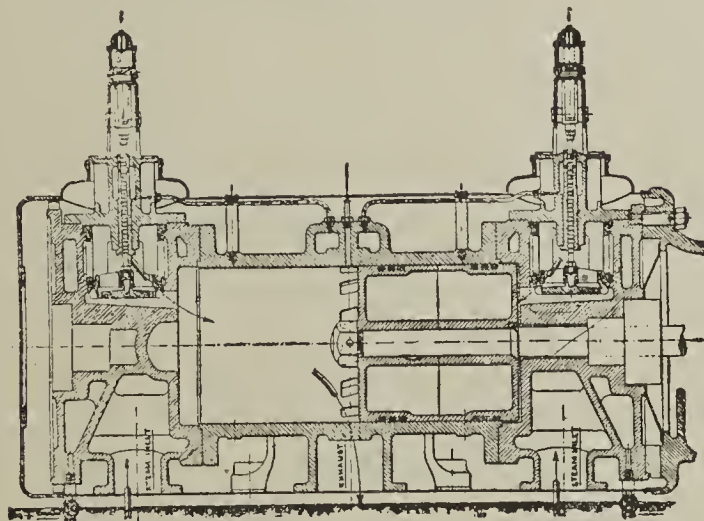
LONGITUDINAL SECTION OF CYLINDER AND VALVE GEAR.
